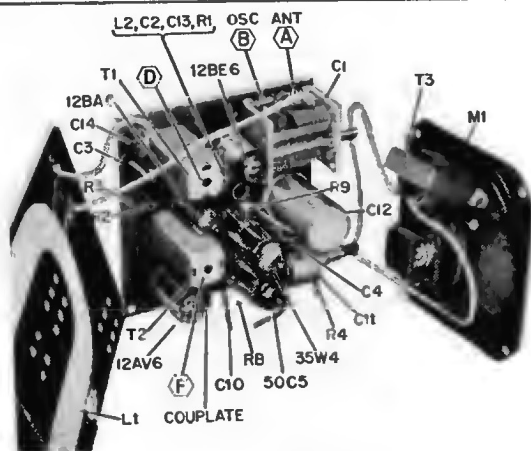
Top View of Chassis. Location of components and alignment points shown.
